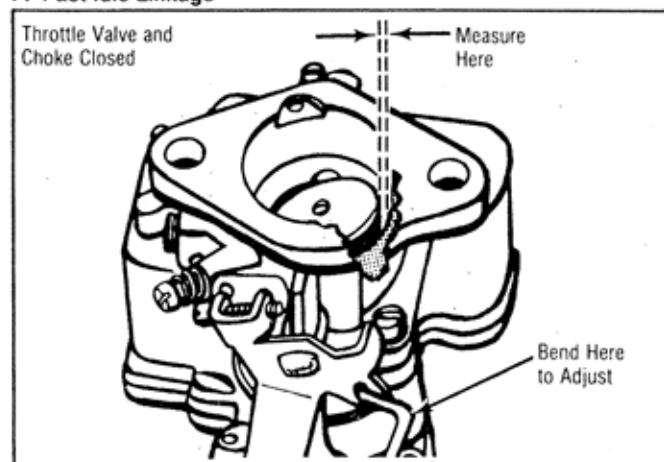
Fast Idle Linkage Adjustment (Type A - If Equipped)
